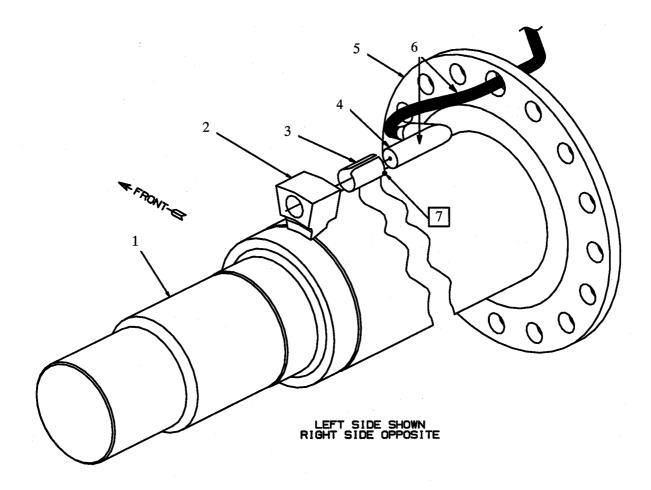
Typical Sensor Installation With 4 Spring Suspension
